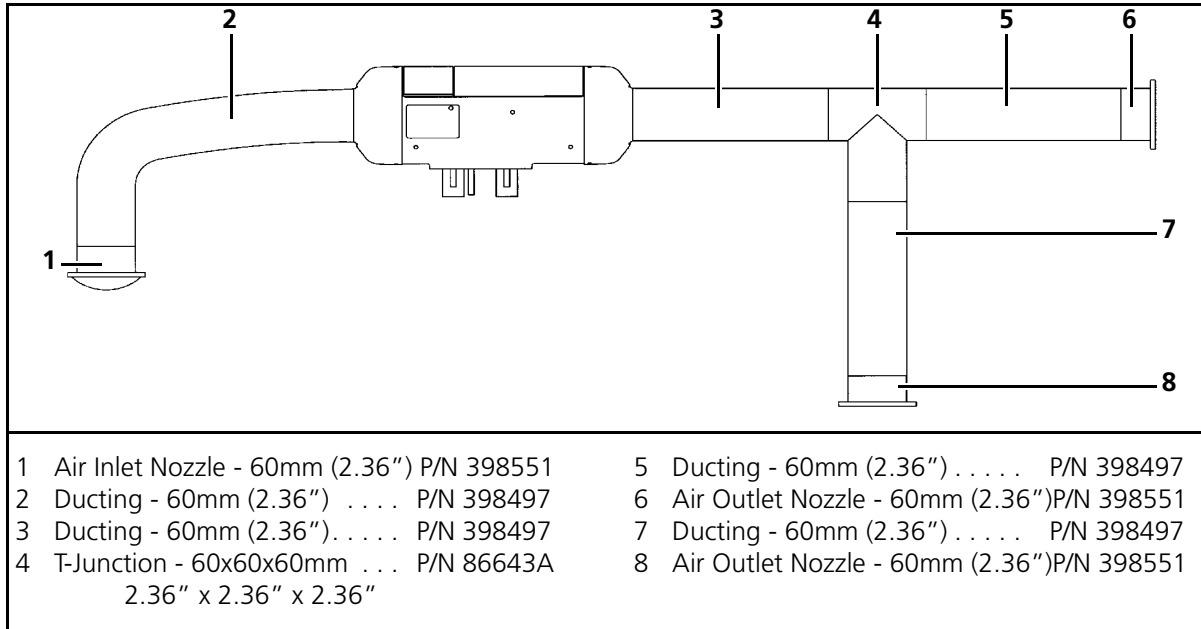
Air Top 2000 / 2000 S - Typical 2 Outlet Ducting Layout
